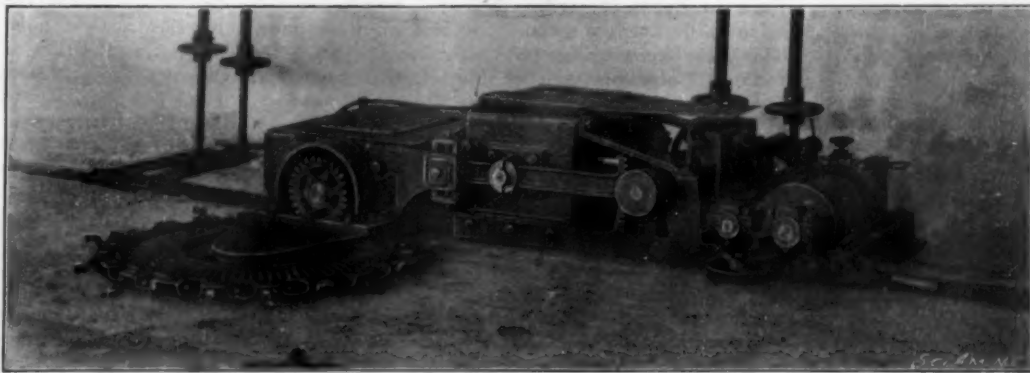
LONGWALL COAL-CUTTING MACHINE, WITH HORIZONTAL CUTTING WHEEL.
